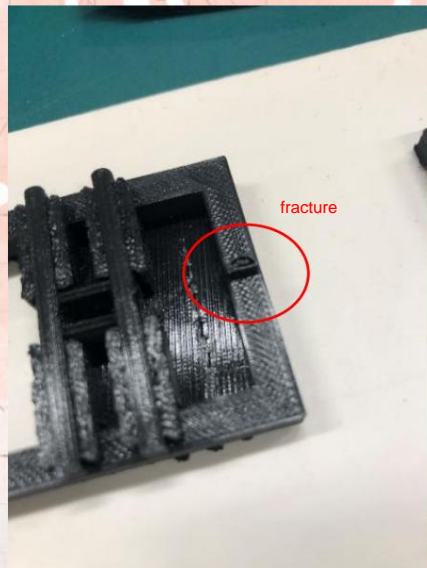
Fracture surface diagram of the driven component; Figure 30. M3 screw driven component, with an added "U" shape.
